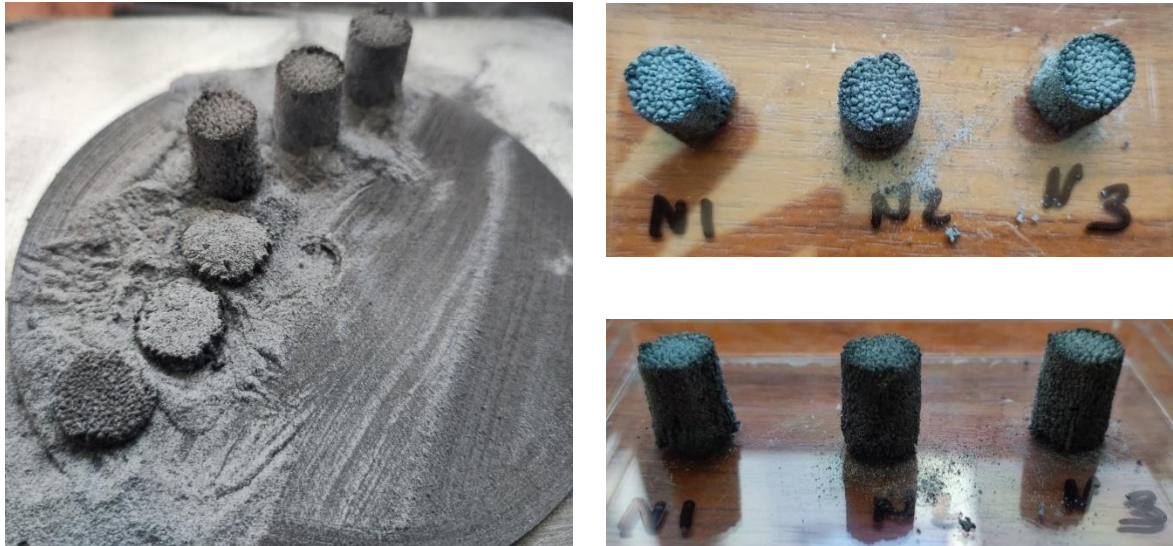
HA10BG10G printed samples. Printing bed post the depowdering step (left), tall cylinder top (upper right) and side (lower right).
